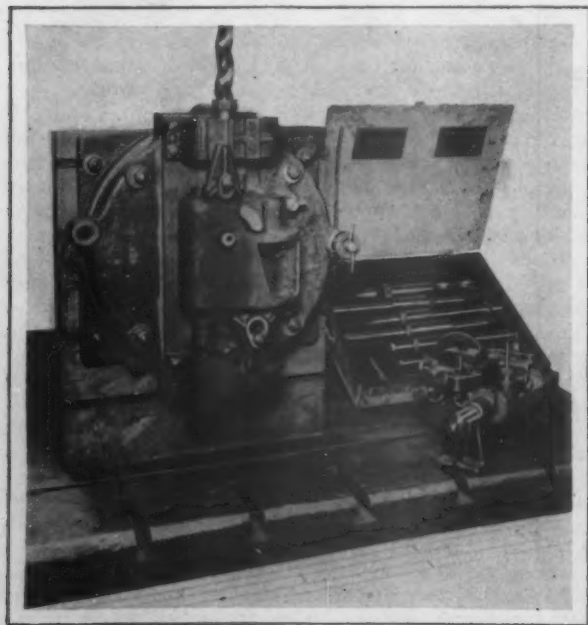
Saving 171 Hr. in the Boring of Quick Change Gear Boxes for Lathes by the Substitution of a Radial Drilling Machine for a Horizontal Boring Machine
